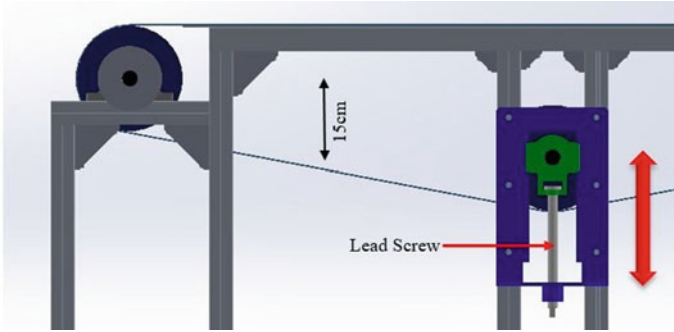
Arrangement of idler pulley mounted on take-up bearing for tensioning
